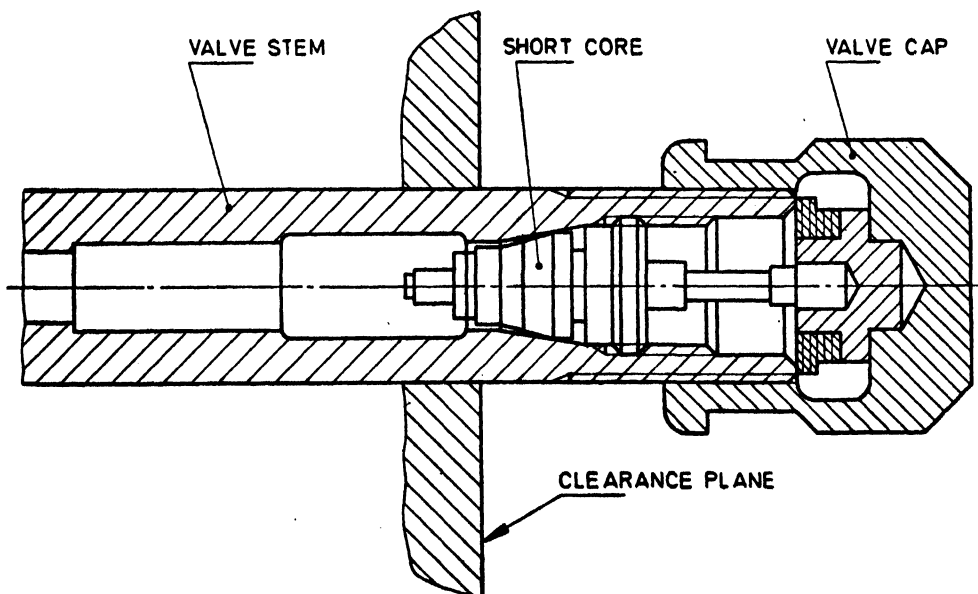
GENERAL ASSEMBLY — SHORT CORE
